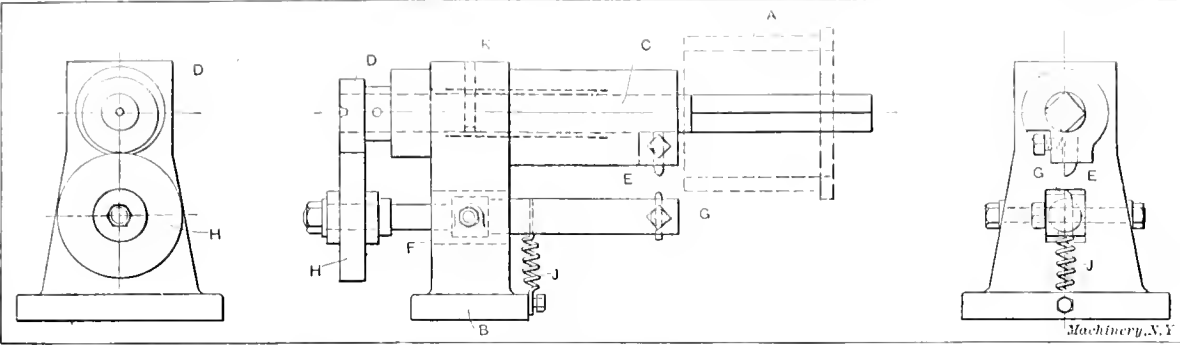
Tool for Boring and Turning Eccentric Rings simultaneously
